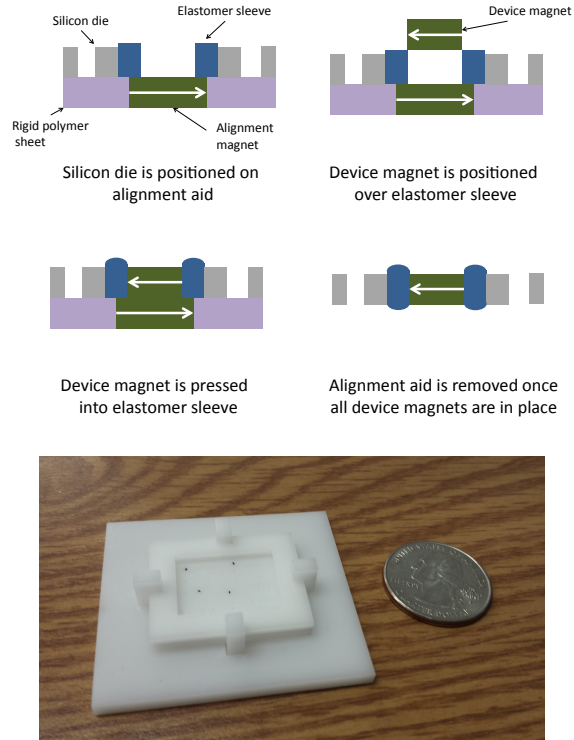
Device magnet assembly. Above: assembly process. Below: Assembly aid. Alignment magnets appear as small black dots.
